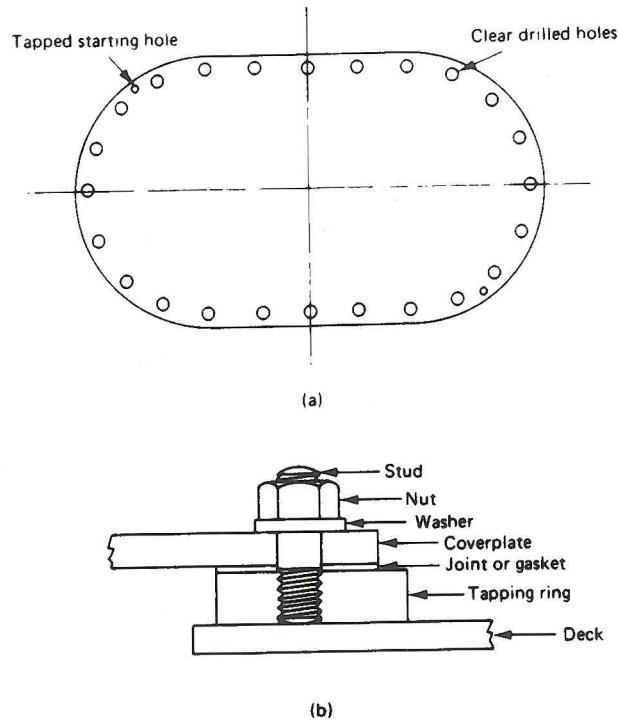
Manhole cover: (a) plate; (b) detail of securing arrangement
